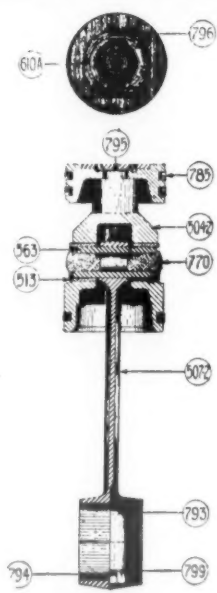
Piston and connecting rod assembly of the Rice machine.
